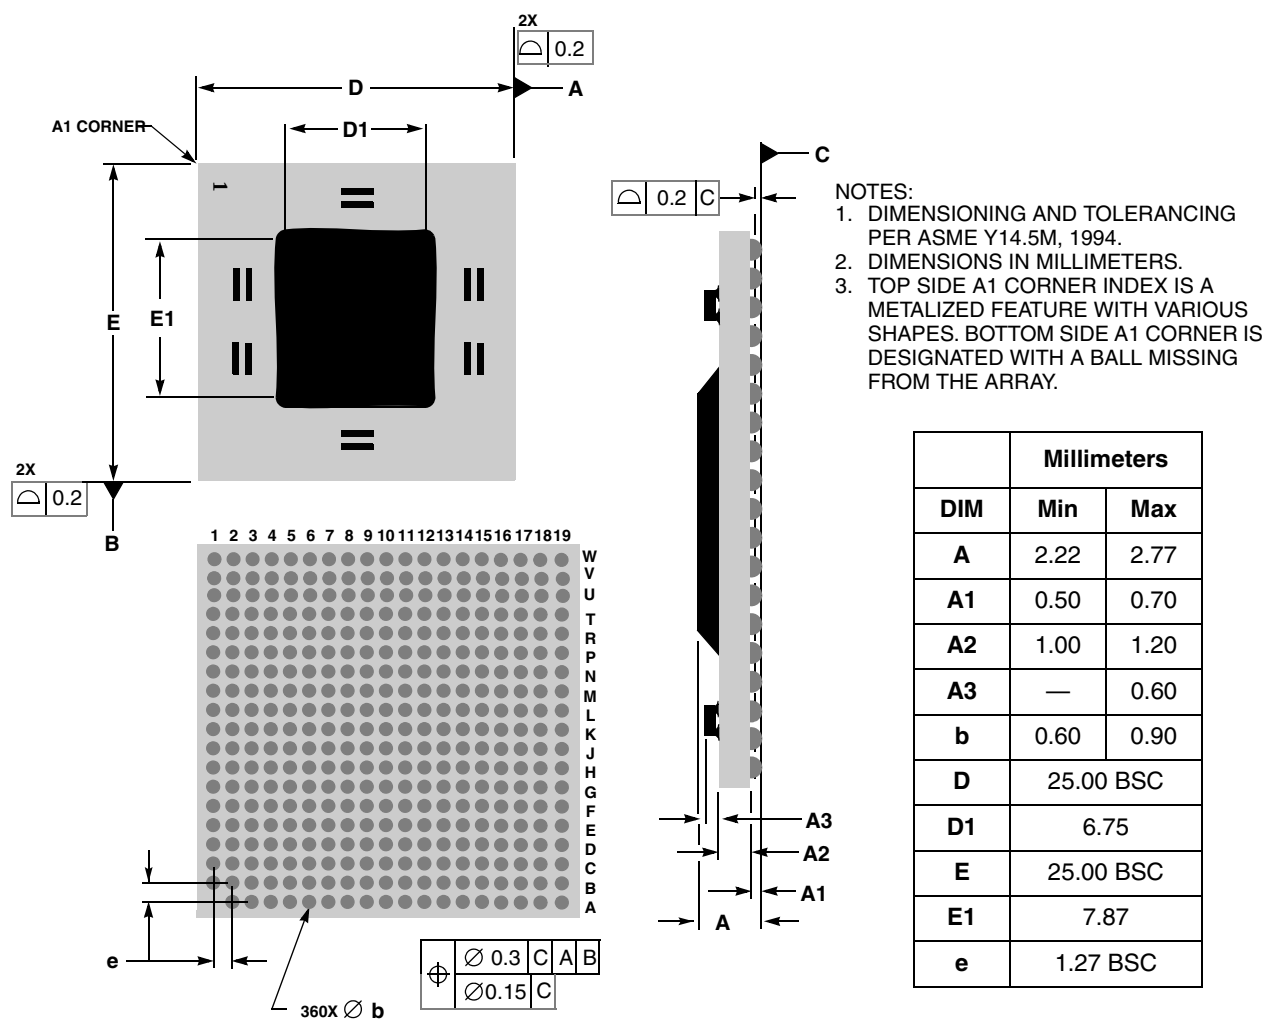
Mechanical Dimensions and Bottom Surface Nomenclature for the MPC755, 360 PBGA Package
